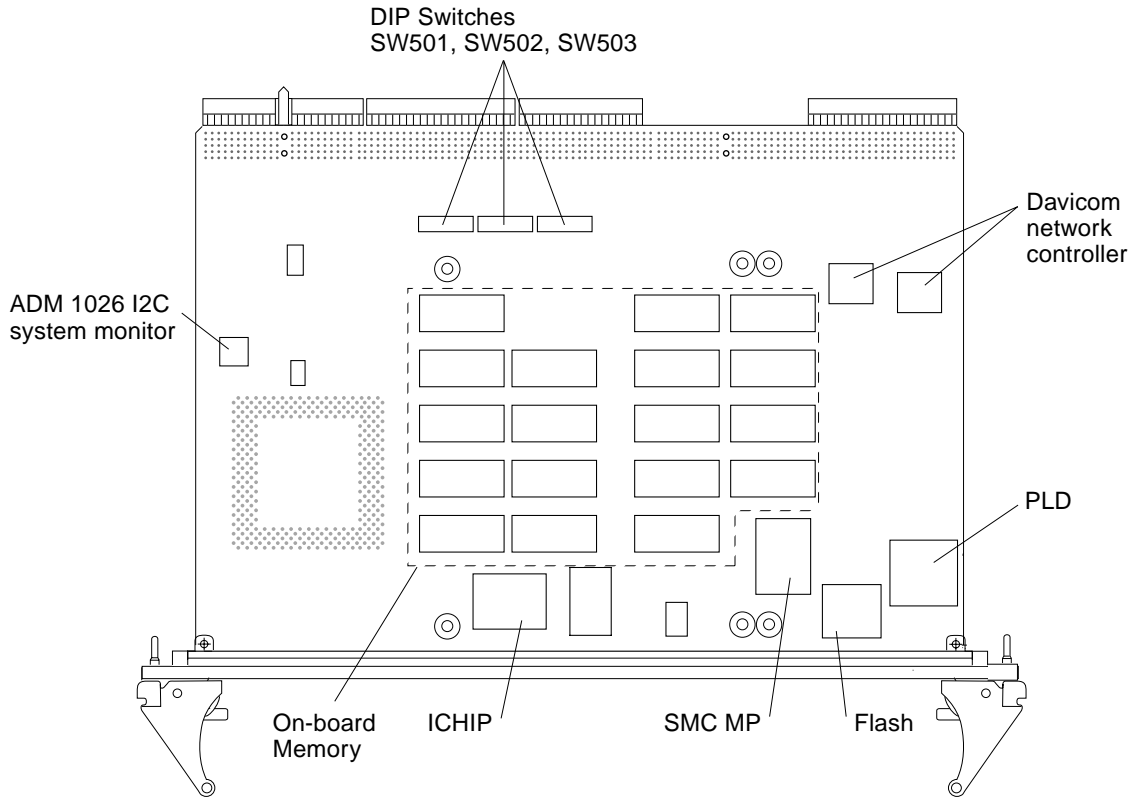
Typical Netra CP2300 Board – Solder Side
